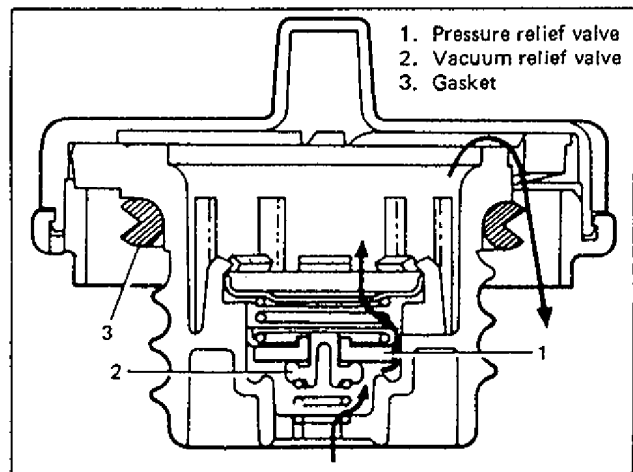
C-5 Fuel Filler Cap Cross-Section (Two Way Valve Type)
